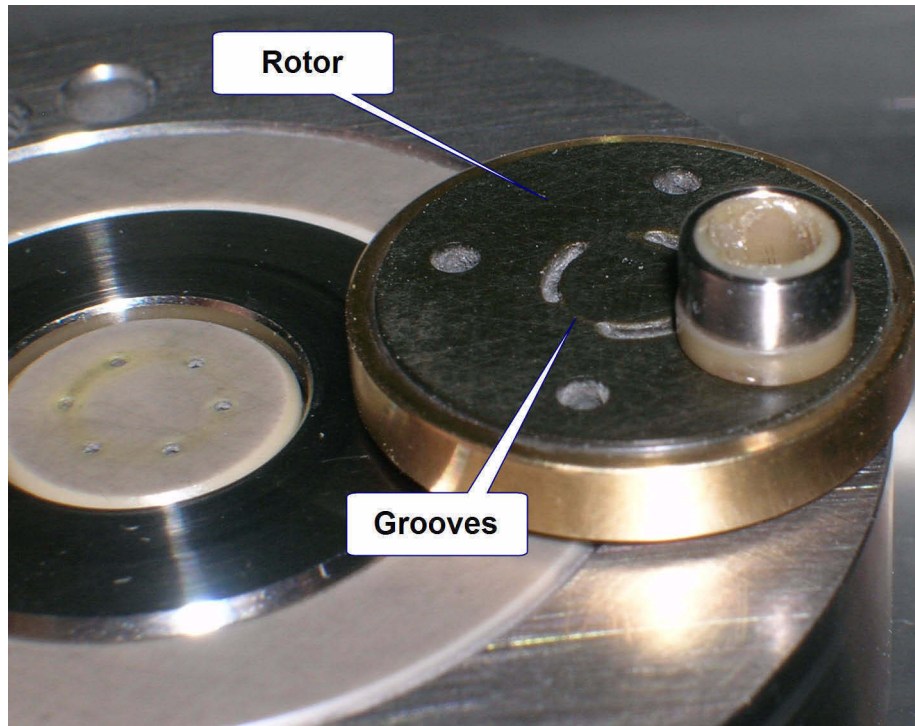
20 Smart valve components with new spring holder made of ETFE
